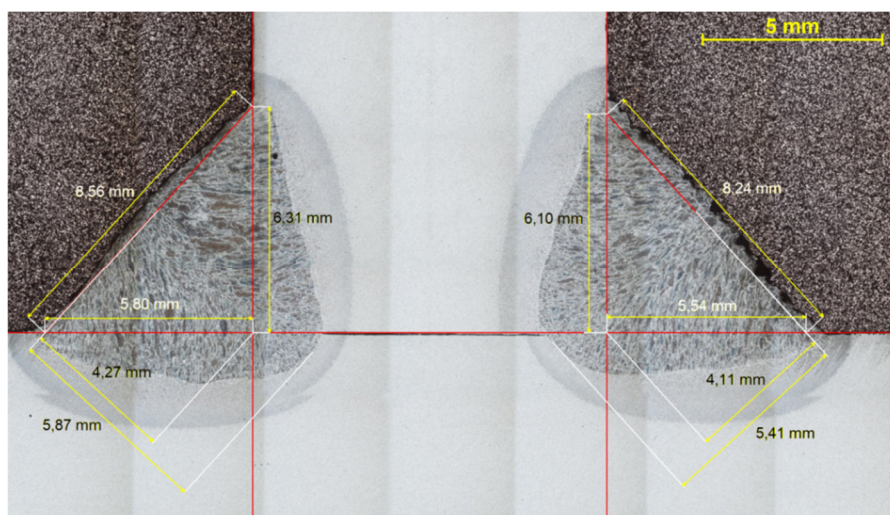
Metallographic sample of Weld Q10 ($Q = 10 \text{ kJ}\cdot\text{cm}^{-1}$)—1st bead (right) and 2nd bead (left).
